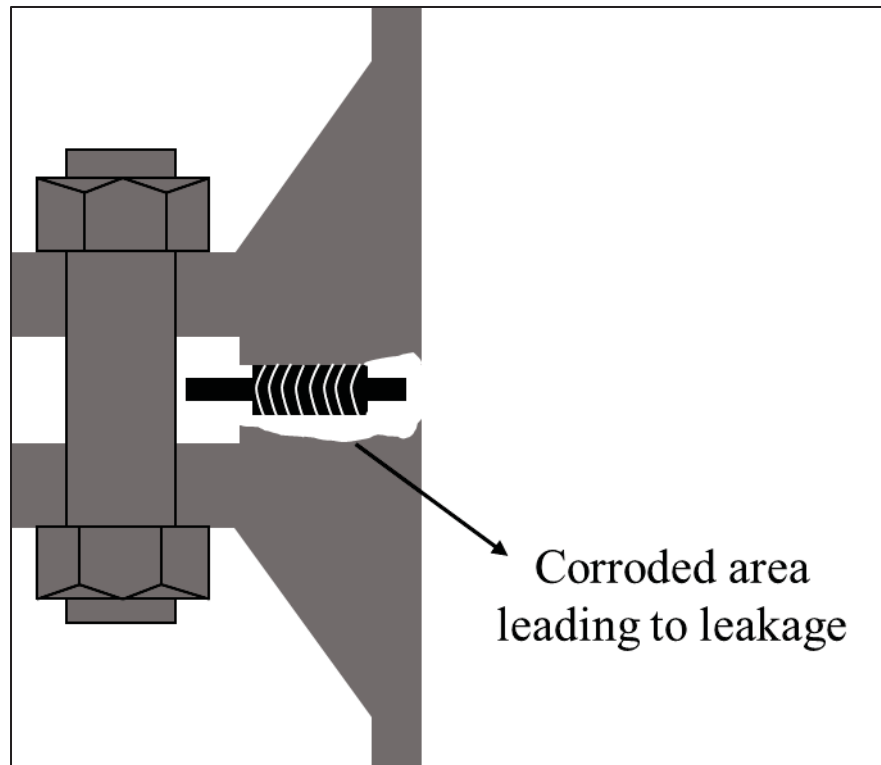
Schematic illustration depicting crevice corrosion on the flange face at the interface between the flange and the standard spiral wound gasket, resulting in leakage
